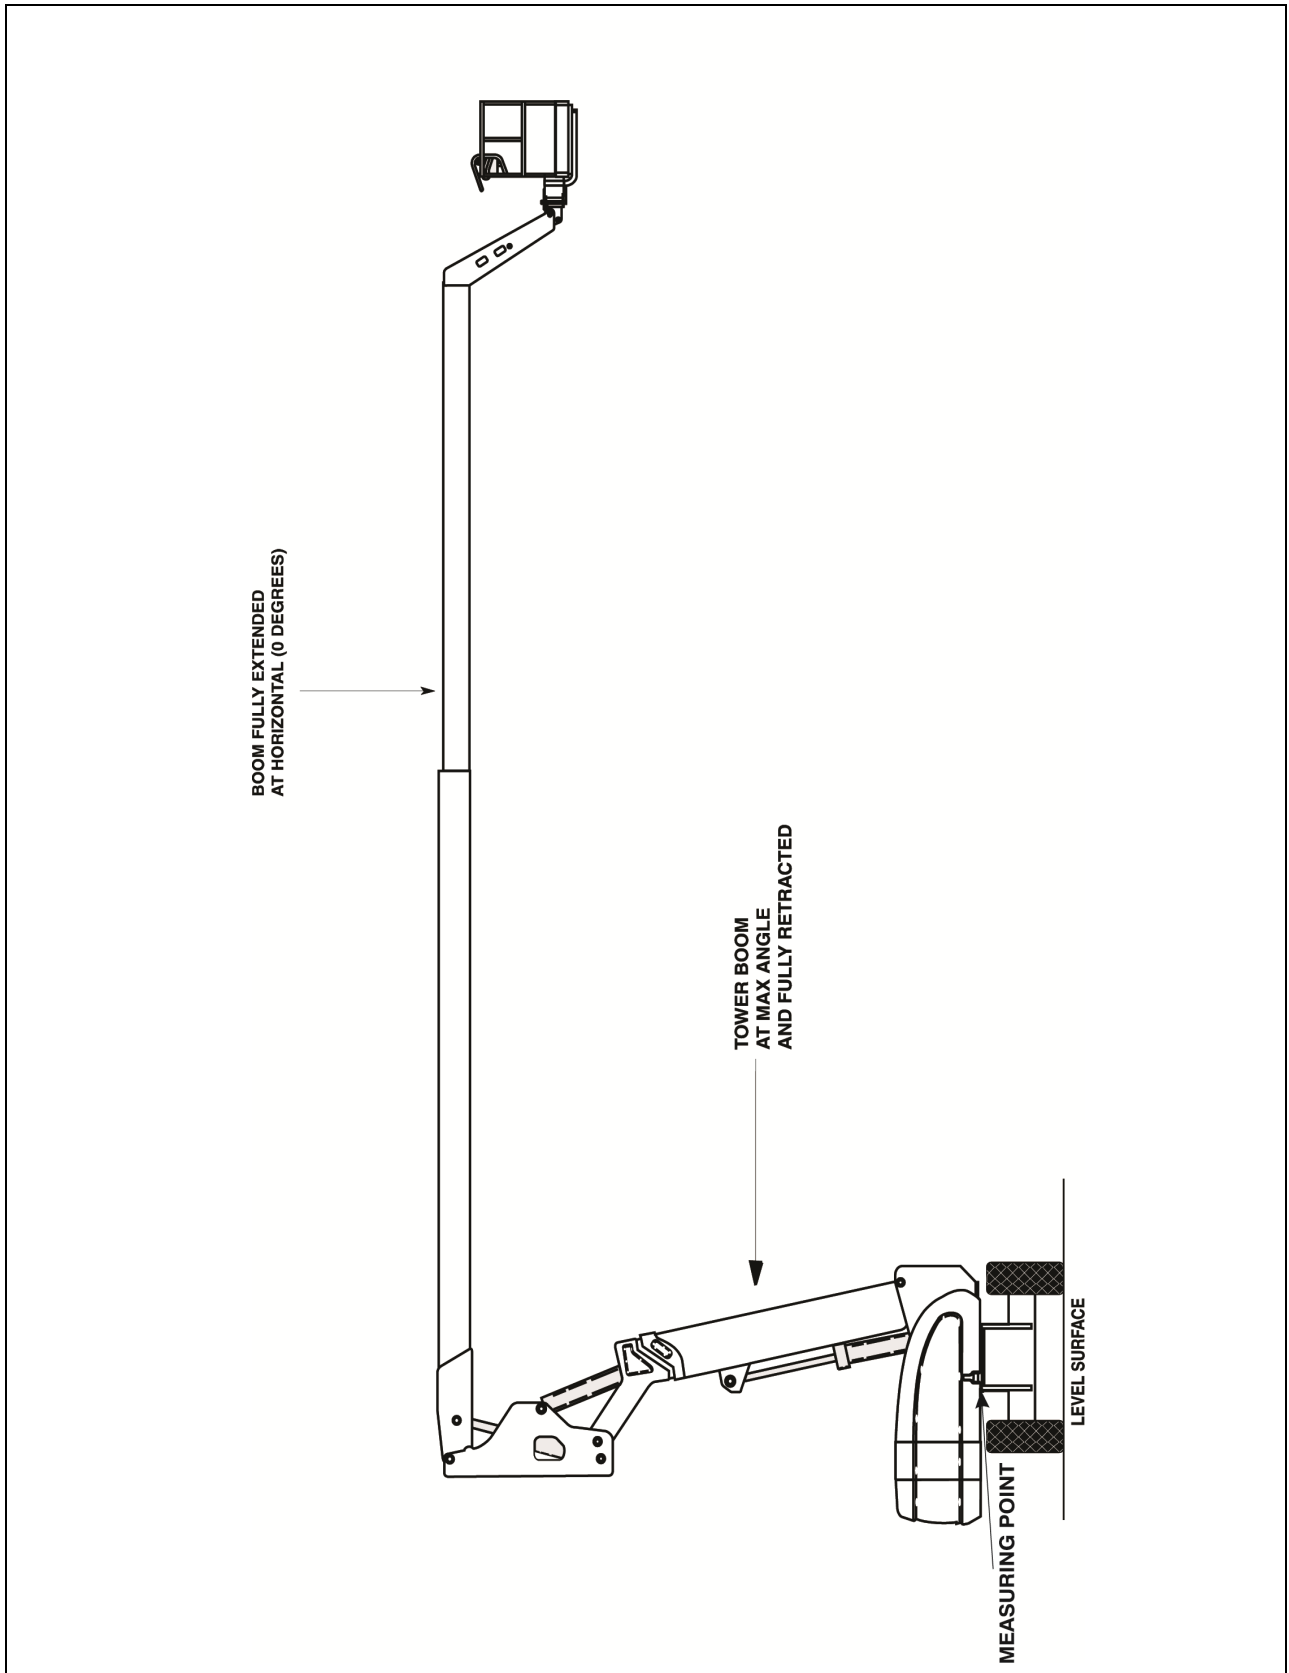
Swing Bearing Tolerance Boom Placement (Sheet 2 of 2)
